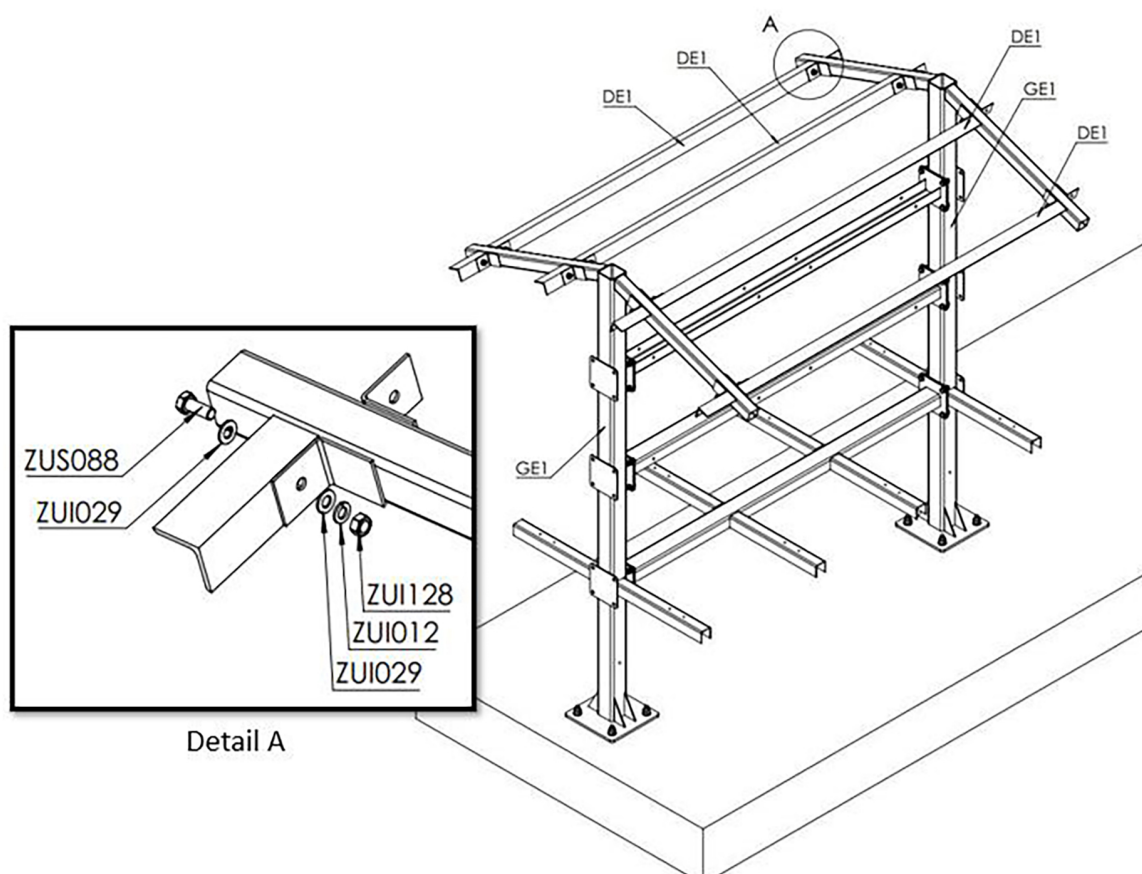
Assembly — Inverter rack — DE1, GE1 (detailed view)
